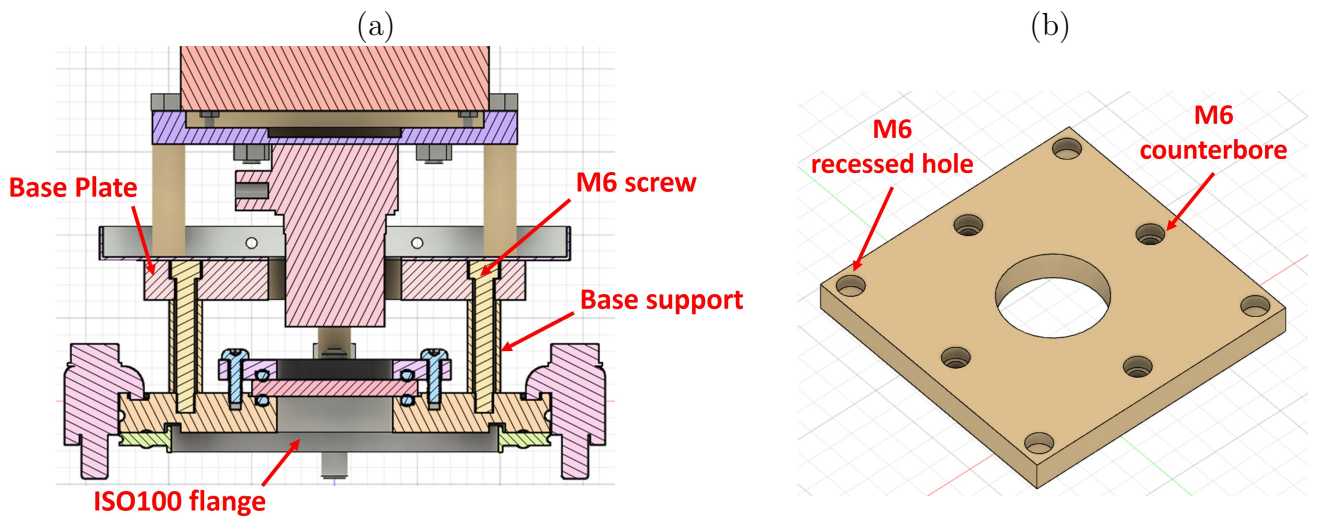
(a) The cross-section of the Base Plate and ISO100 flange. (b) The CAD drawing of the Base Plate.
